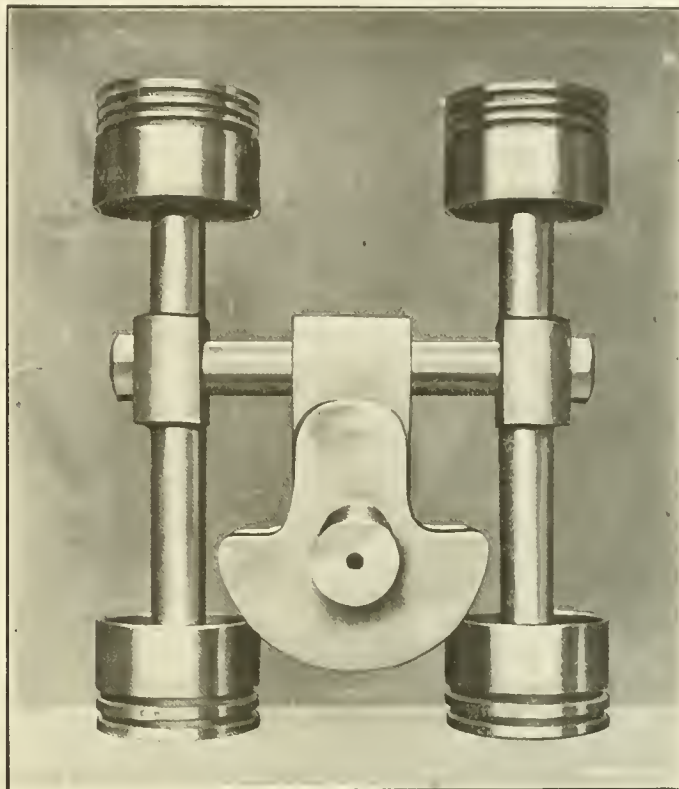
Pistons, Rods, Crosspiece, Sliding-block and Crankshaft of the H Engine
